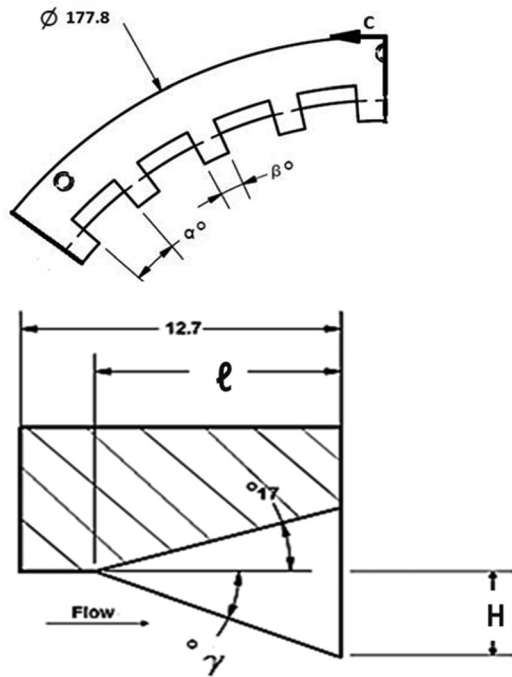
Schematic of the saw-tooth spoiler (dimensions are in mm)
